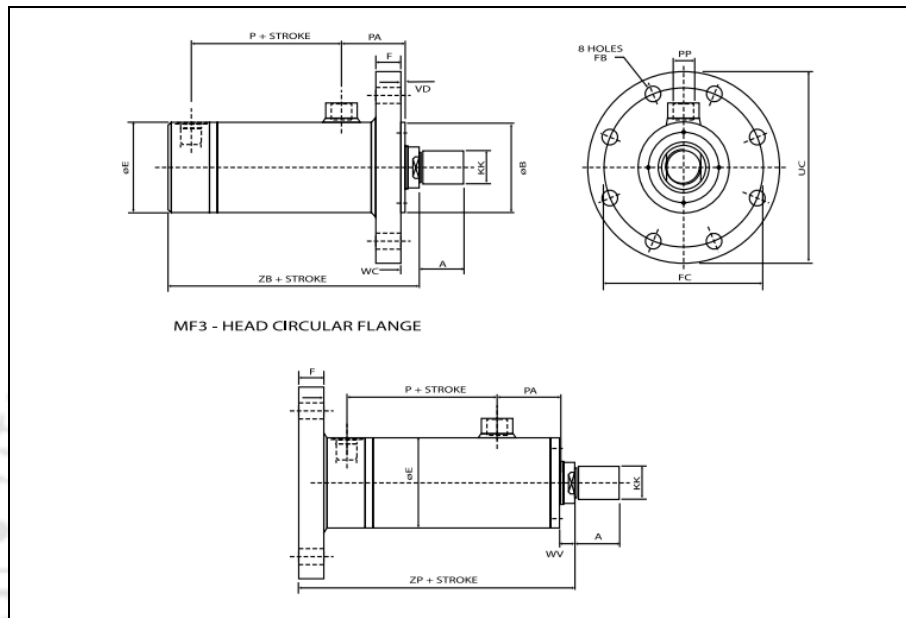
35: 2D drawing of double acting hydraulic cylinder
